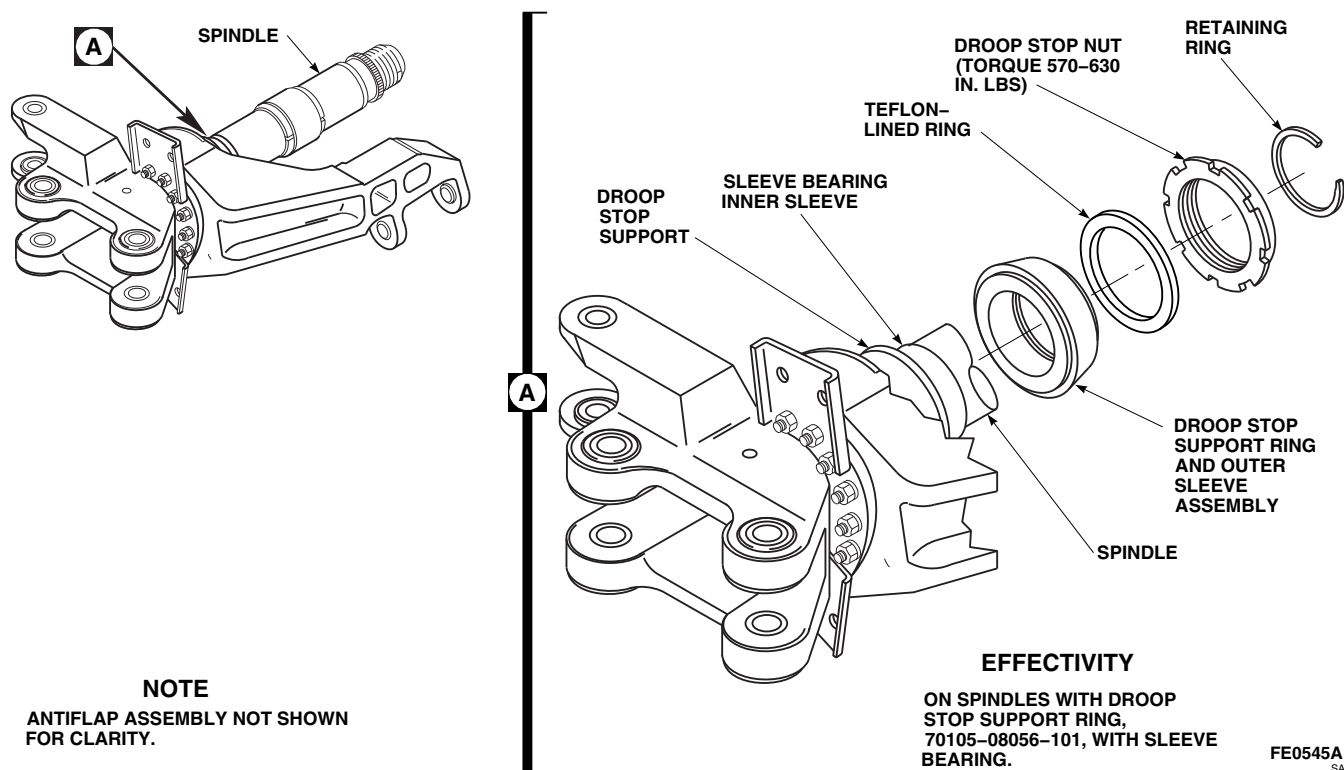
ACCESS ANTIFLAP ASSEMBLY BOLTS
